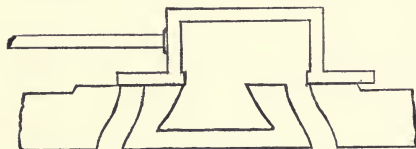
VALVE FOR EXPANSIVE WORKING.
